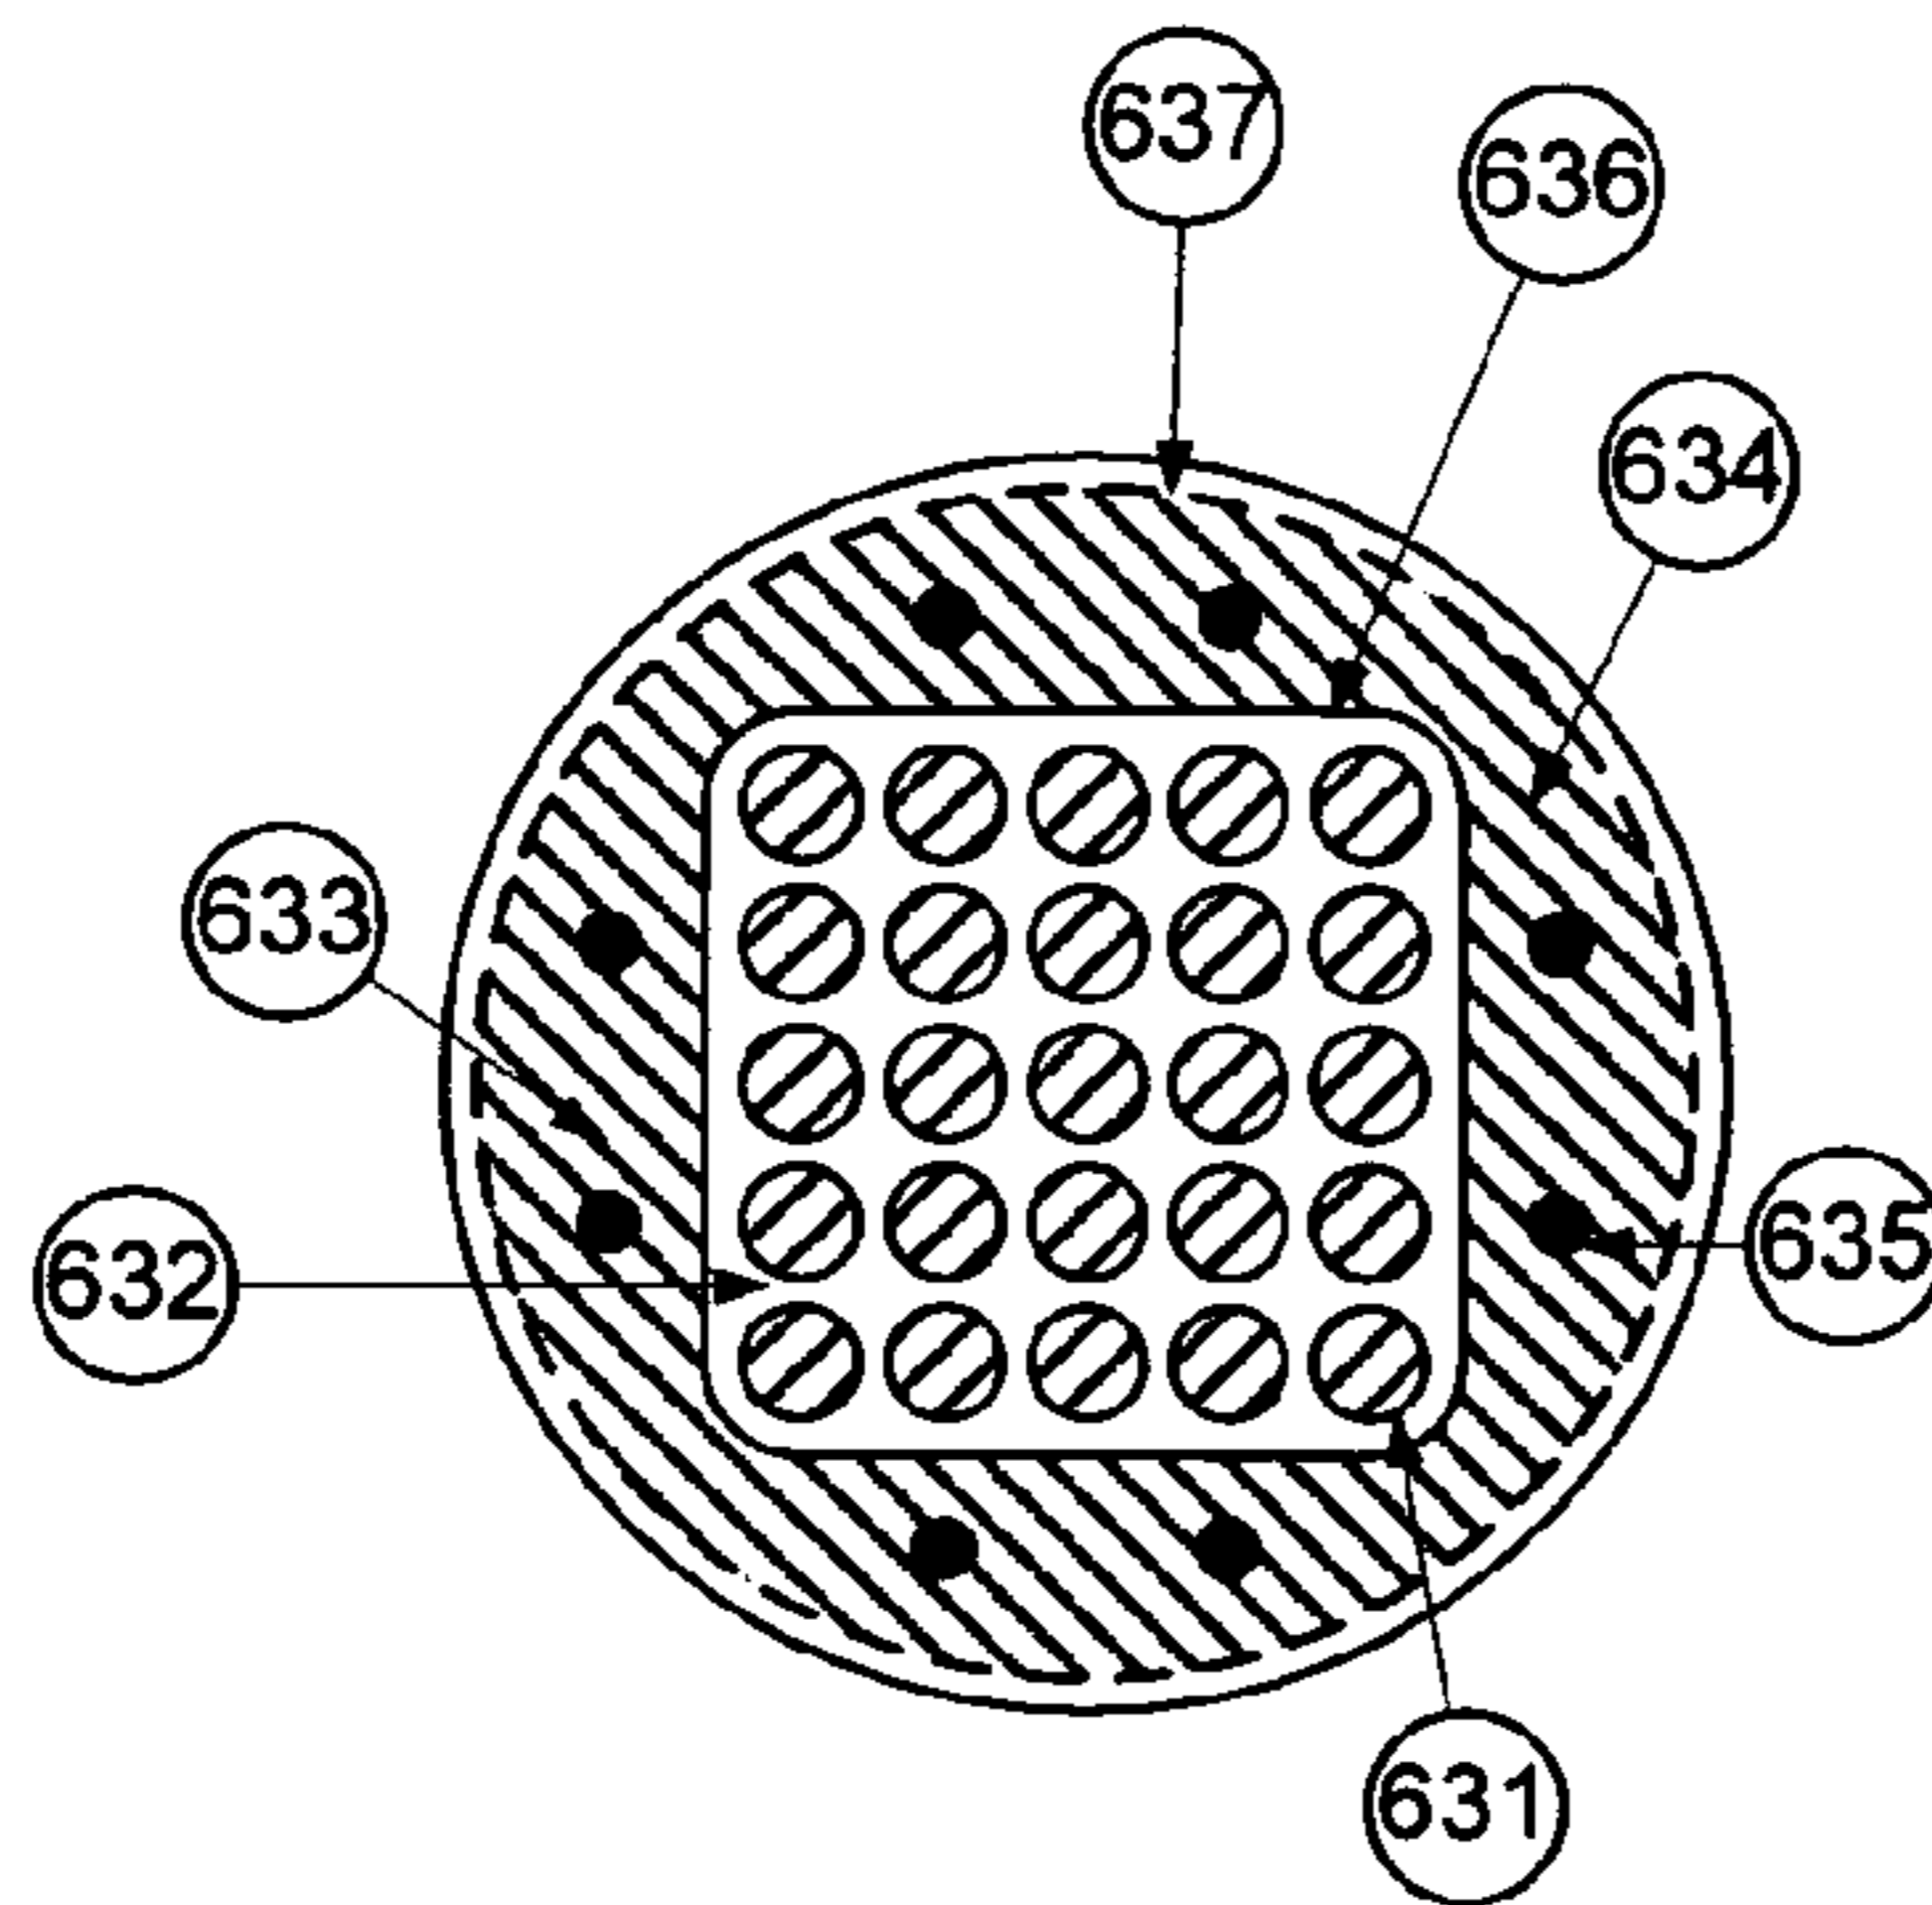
Cross-sectional view of protective tube layout showing use of square pitched tubes surrounded by an axial flow baffle
